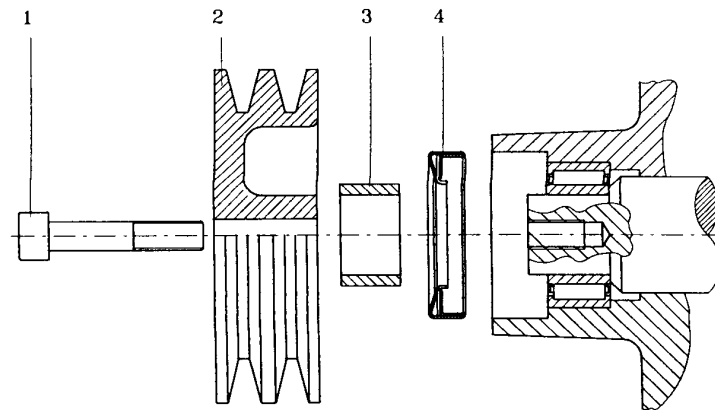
COMPRESSOR SHEAVE AND SLEEVE SERVICING
